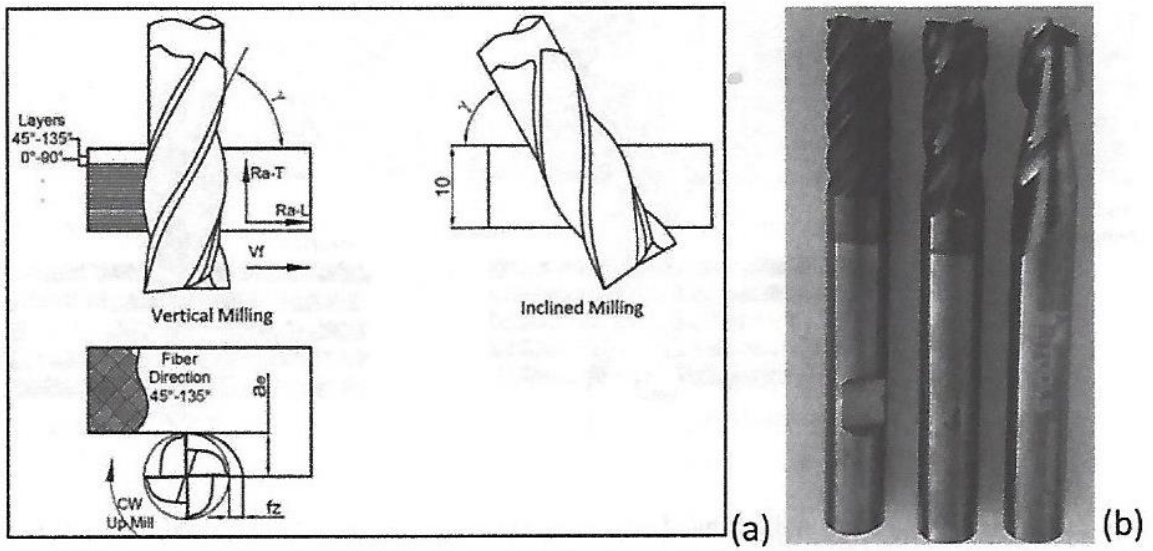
a Details of vertical and incline milling positions, b 2-4-6 flutes helical helix end mill tools (Can 2017)
